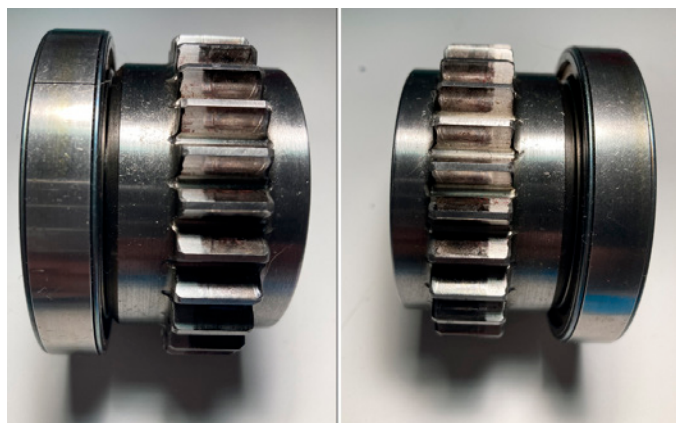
Sprag Clutch Gear (Gear #3) pictured with its support bearing in place.
